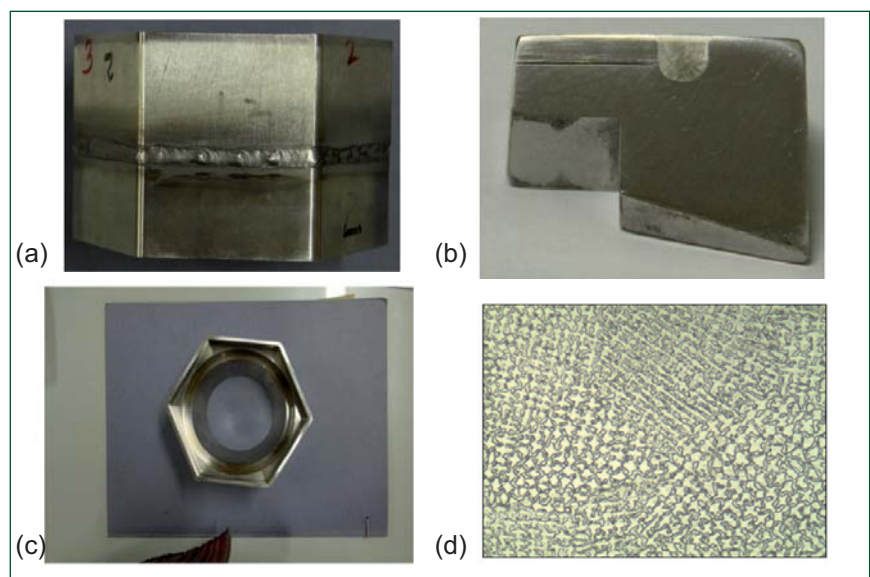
(a) A-TIG weld joint of alloy D9 hexcan with SS 316LN foot assembly, (b) cross section of the weld showing complete penetration in single pass, (c) the inside of the hexcan weld joint showing no excessive heating and decoloration and (d) weld metal microstructure
